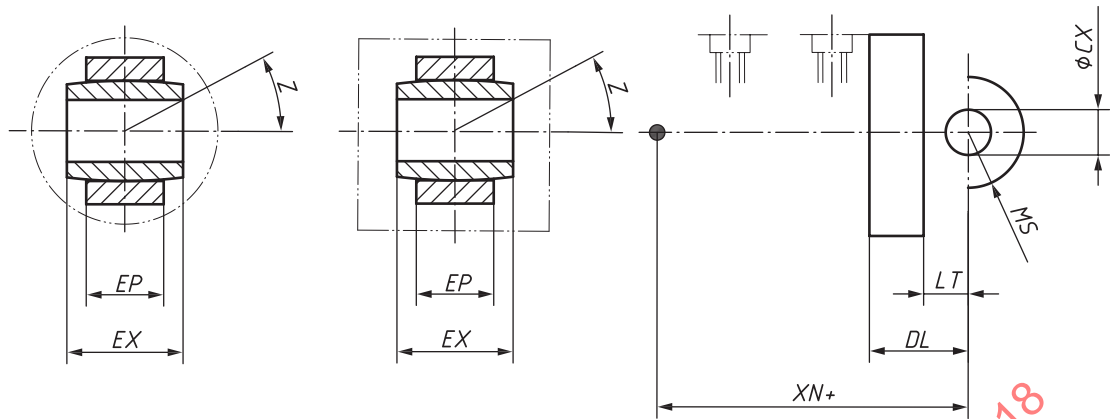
MP6 — Cap, detachable eye with spherical bearing
